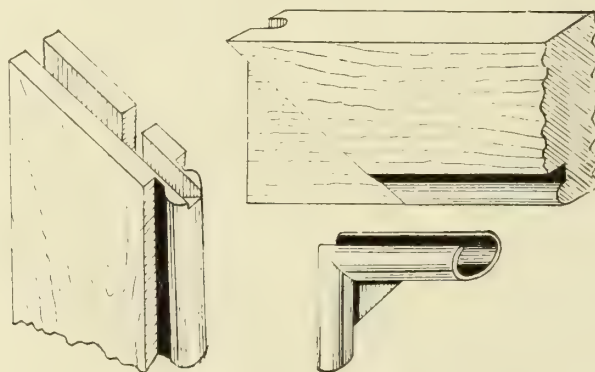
SHOWING DETAILS OF CONSTRUCTION
